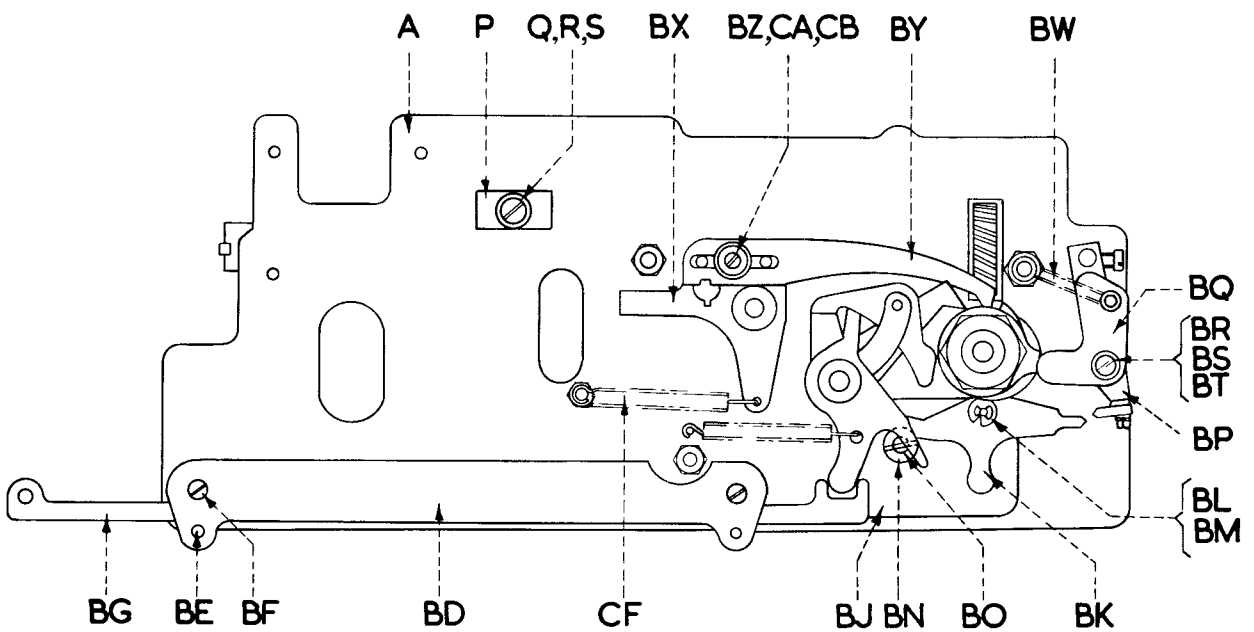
PERFORATOR OPERATING UNIT (PARTIAL ASSEMBLY)
